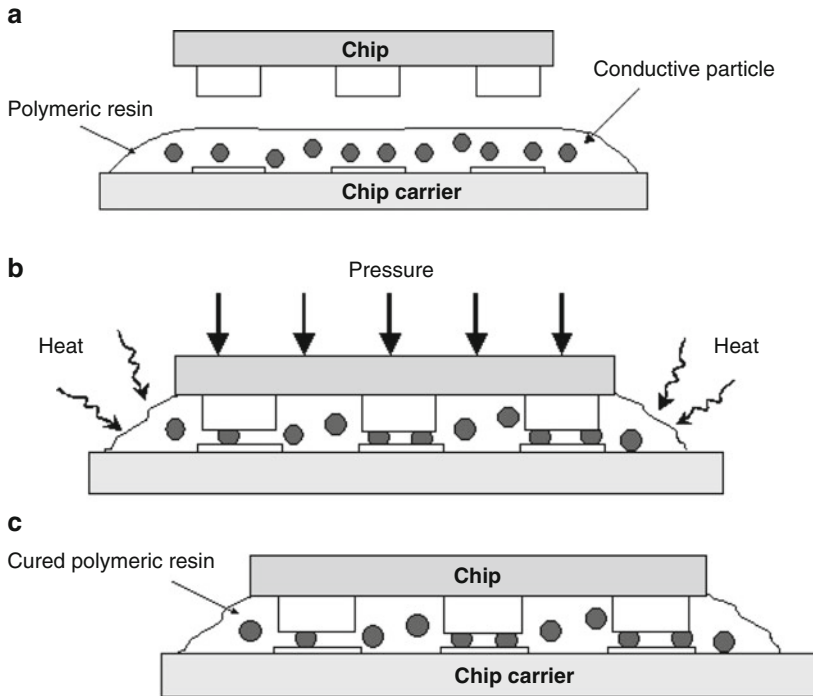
A series of schematics illustrating the steps in forming an ACA joint: (a) Component parts: a bumped die and mating carrier with ACA spread over the surface. (b) Die is mounted with the carrier and held in place when cured. (c) Side view of the completed assembly
